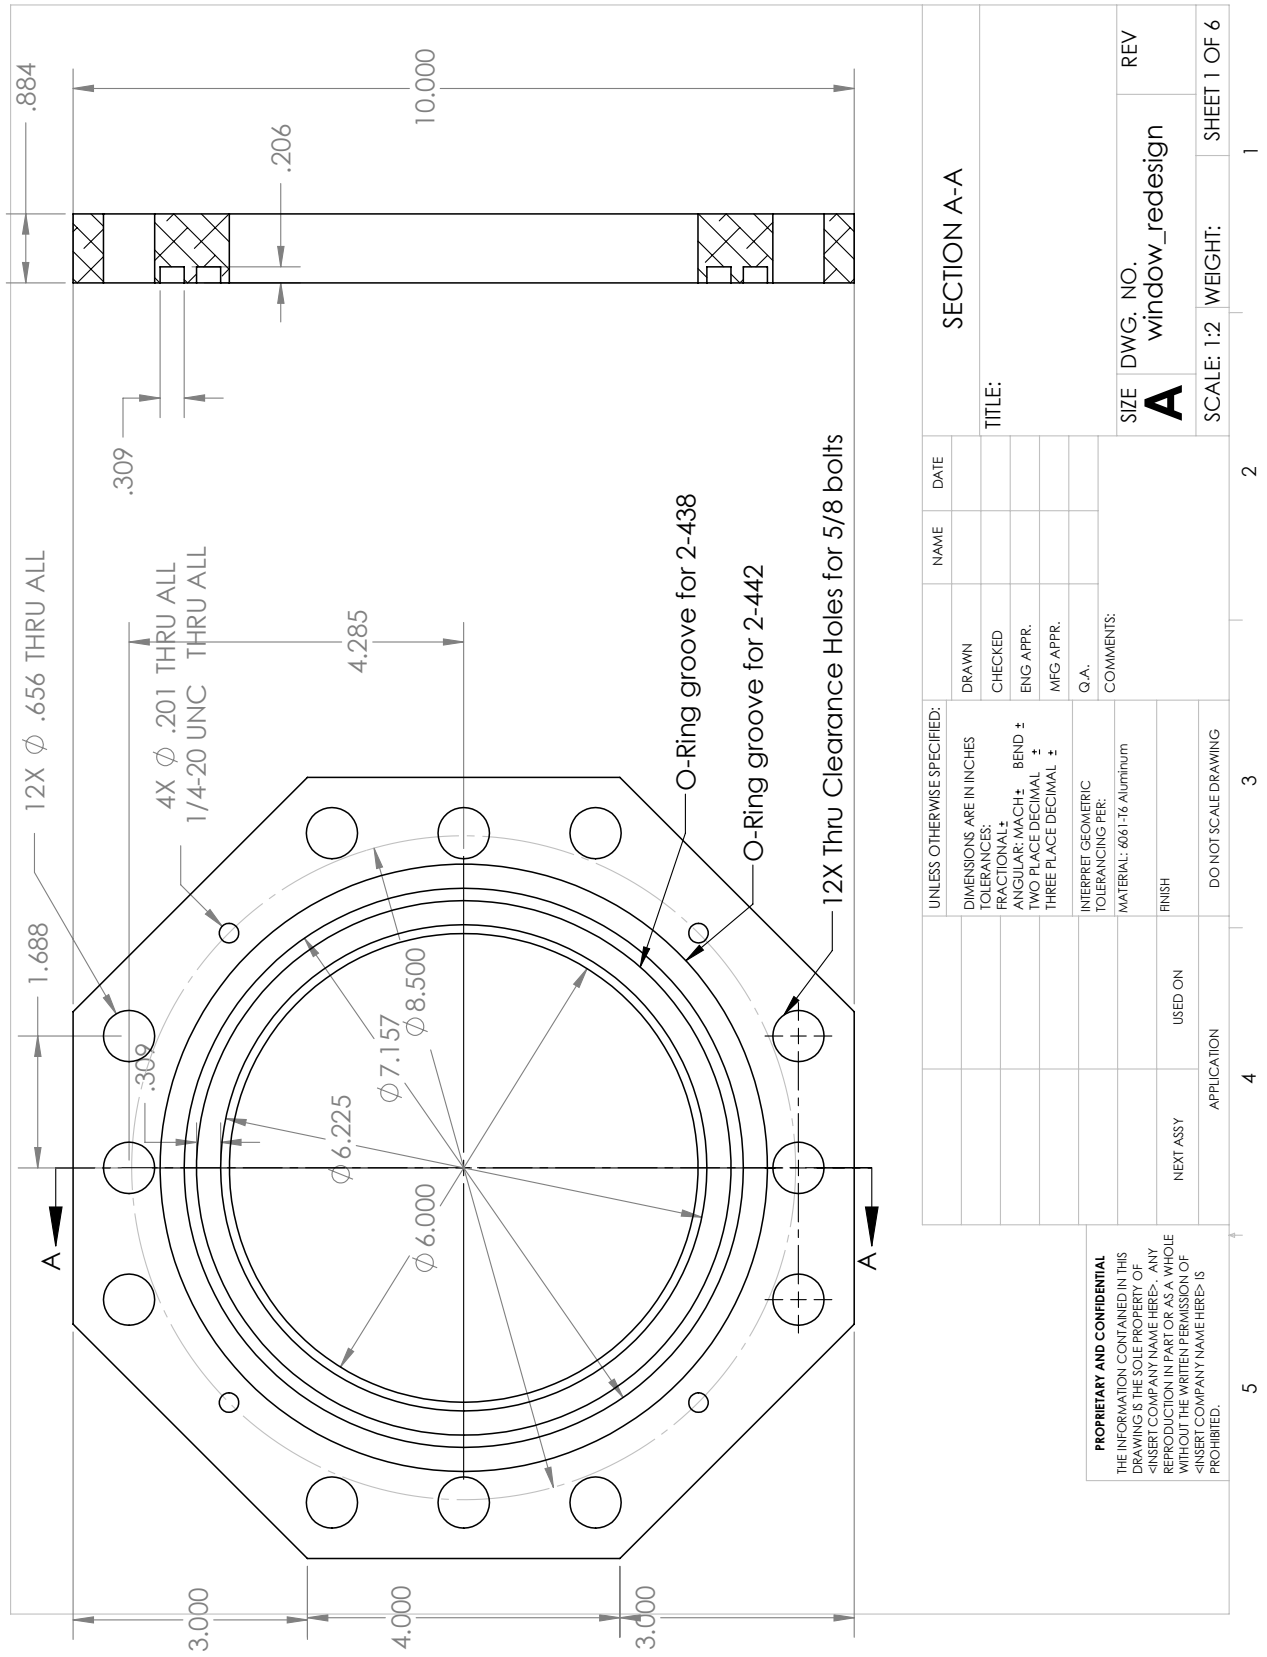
Drawings of the redesigned GDT test section window, part 1.
